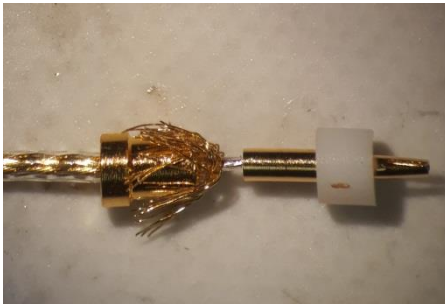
With the inner soldered securely in position, move the crimp insert back up the cable and arrange the outer strands around it as shown in photo. Make sure that none of the outer stands touch the contact assembly or this will lead to a short when the connector is assembled.
